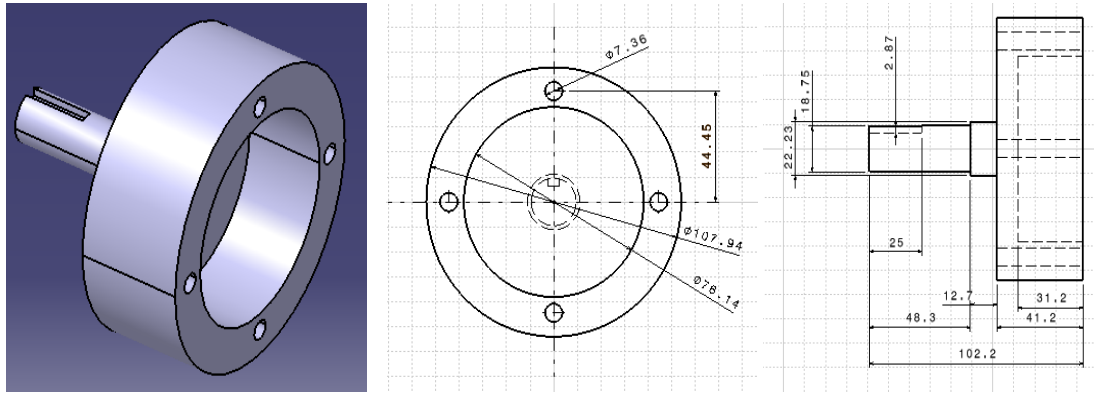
Clutch Coupler (Left); Cross-section of the Coupler (in mm, Right)
